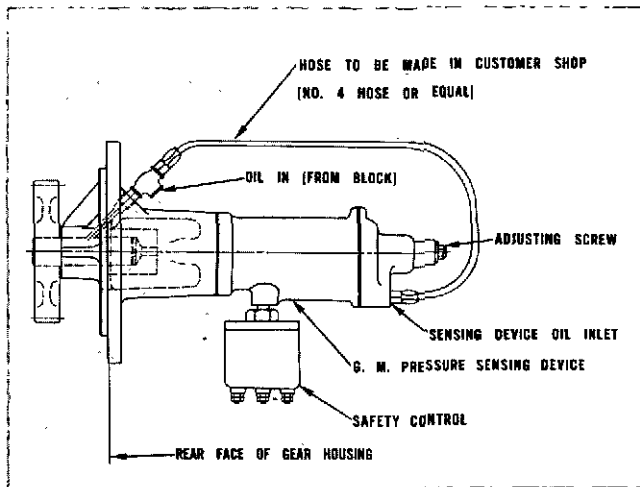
, V40180. Installation of Pressure Sensing Device
